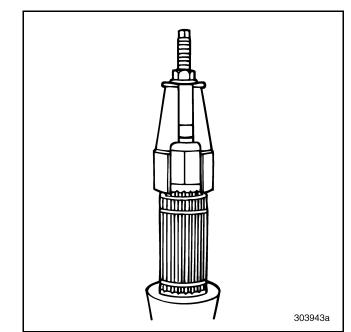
Removing Spigot Bearing from Rear Mainshaft (T313L/T318L Shown)
